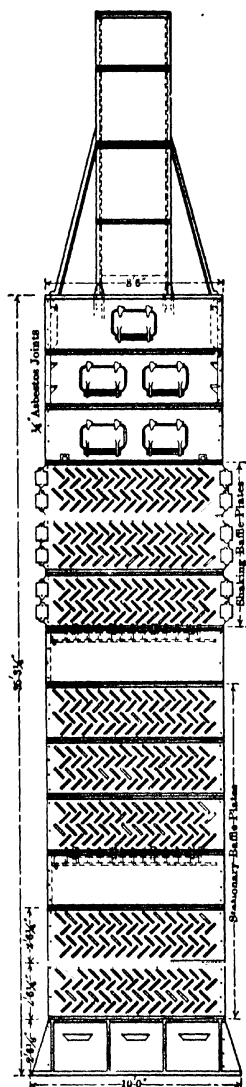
Elevation of stack drier, Edison plant. (Engineering News)
